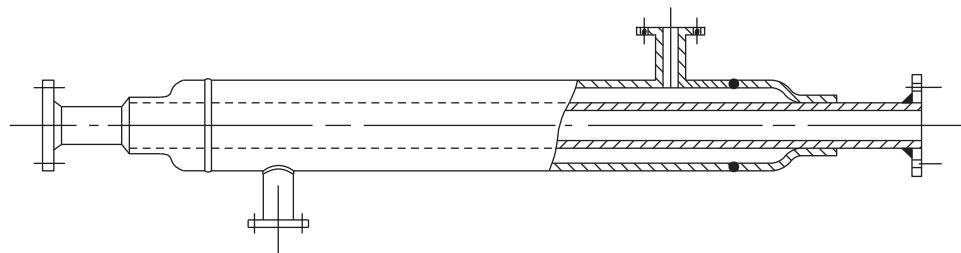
Double-pipe exchanger (constructed for weld fittings).
